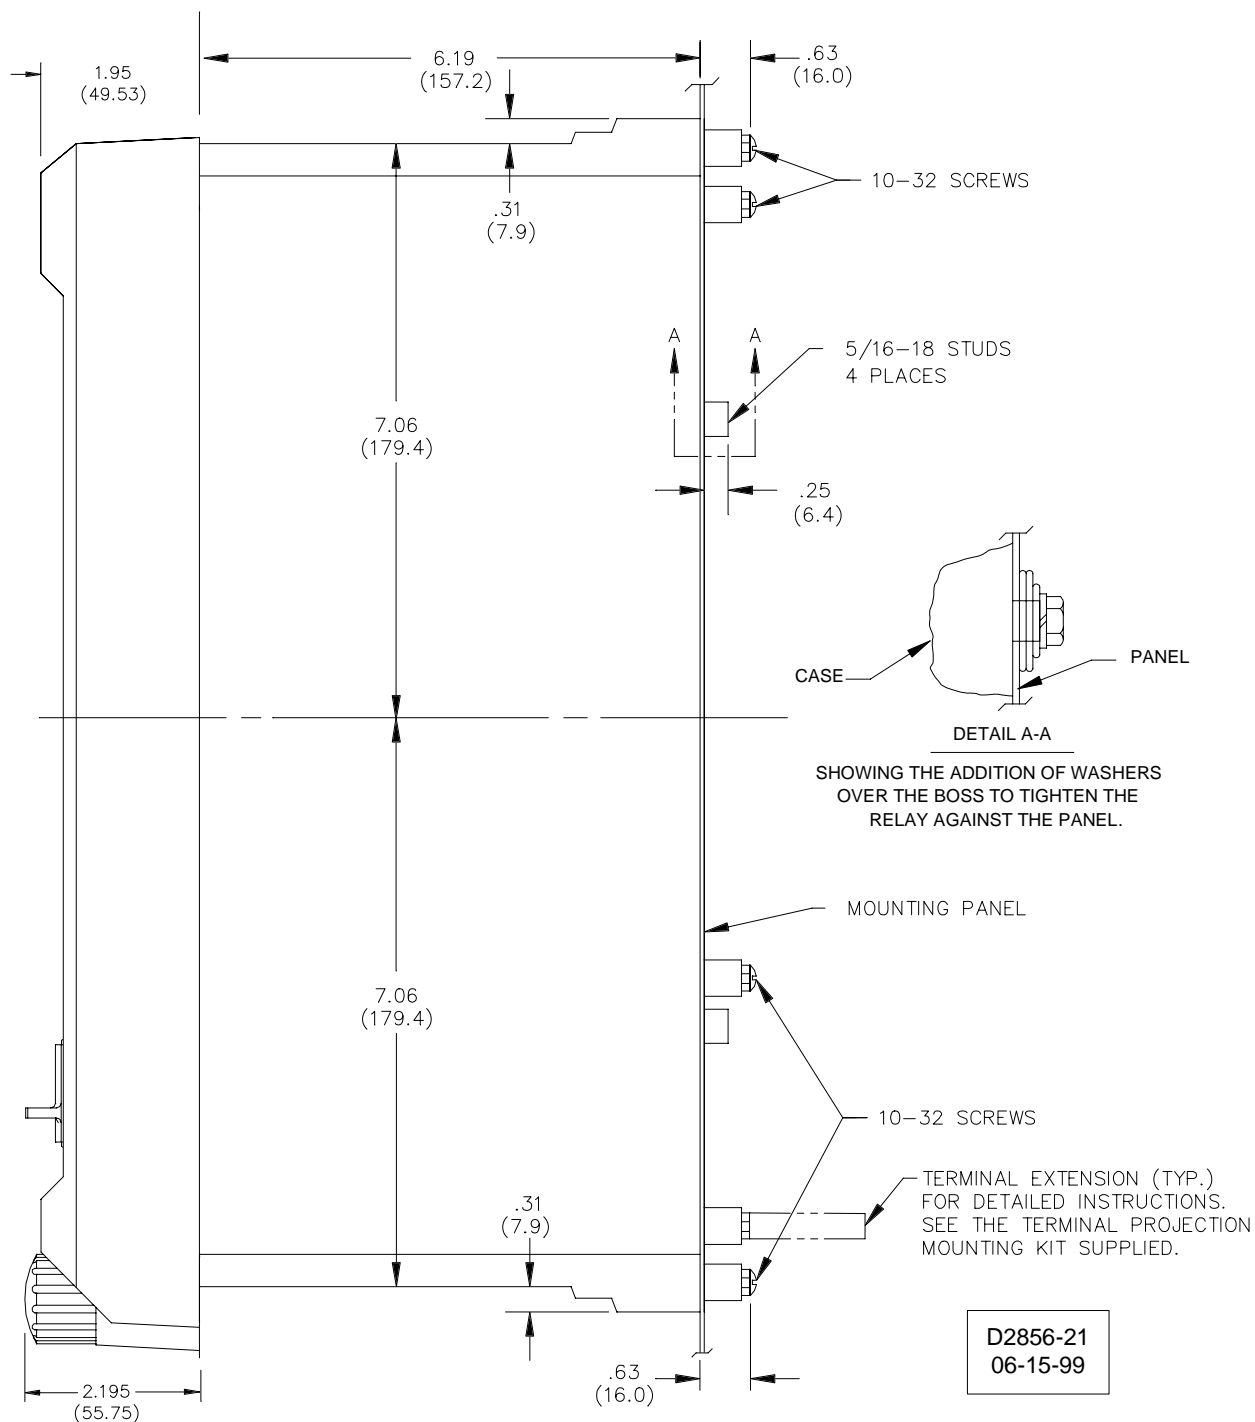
Case and Cover Dimensions, Projection Mounting, Side View
